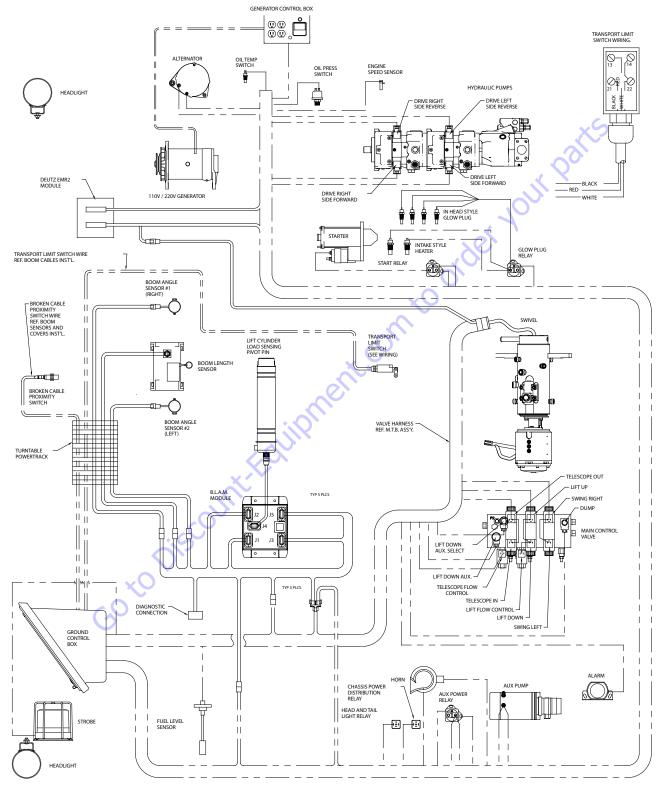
Turntable Electrical Components - Sheet 1 of 2
